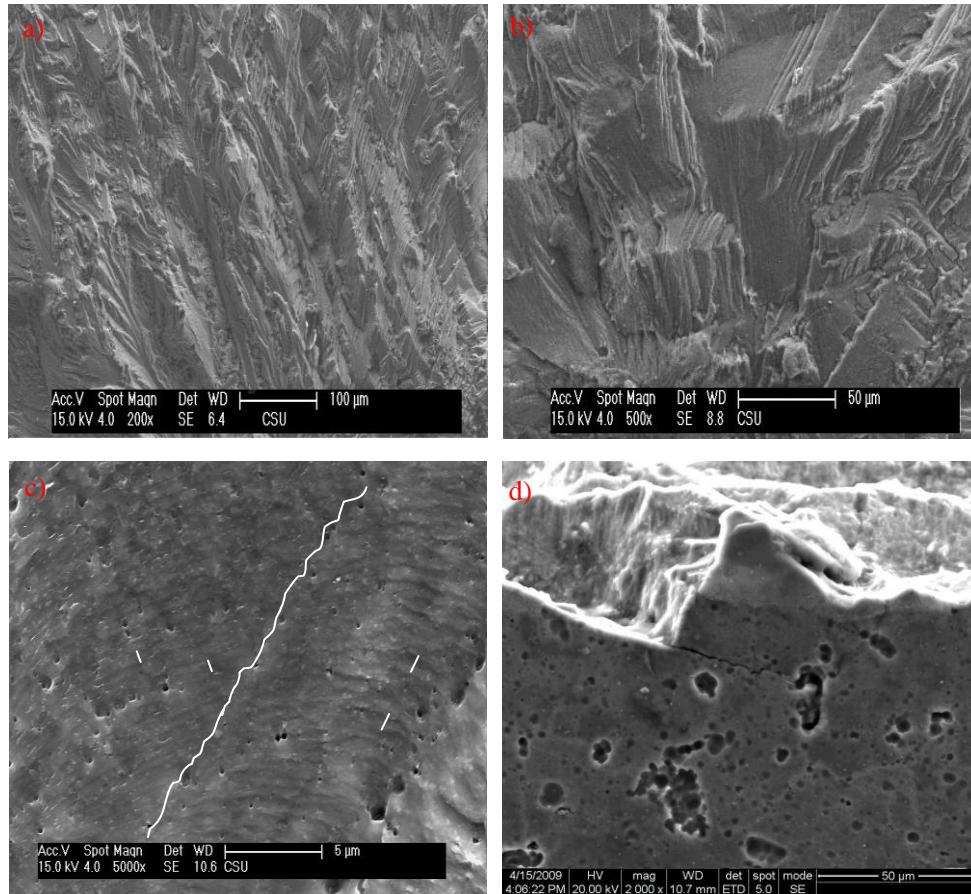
Fracture morphology of fatigue specimen  $N=3 \times 10^6$
